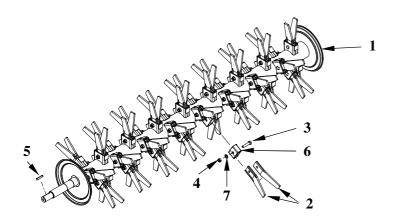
Replacement of welded flails in conditioner roller
